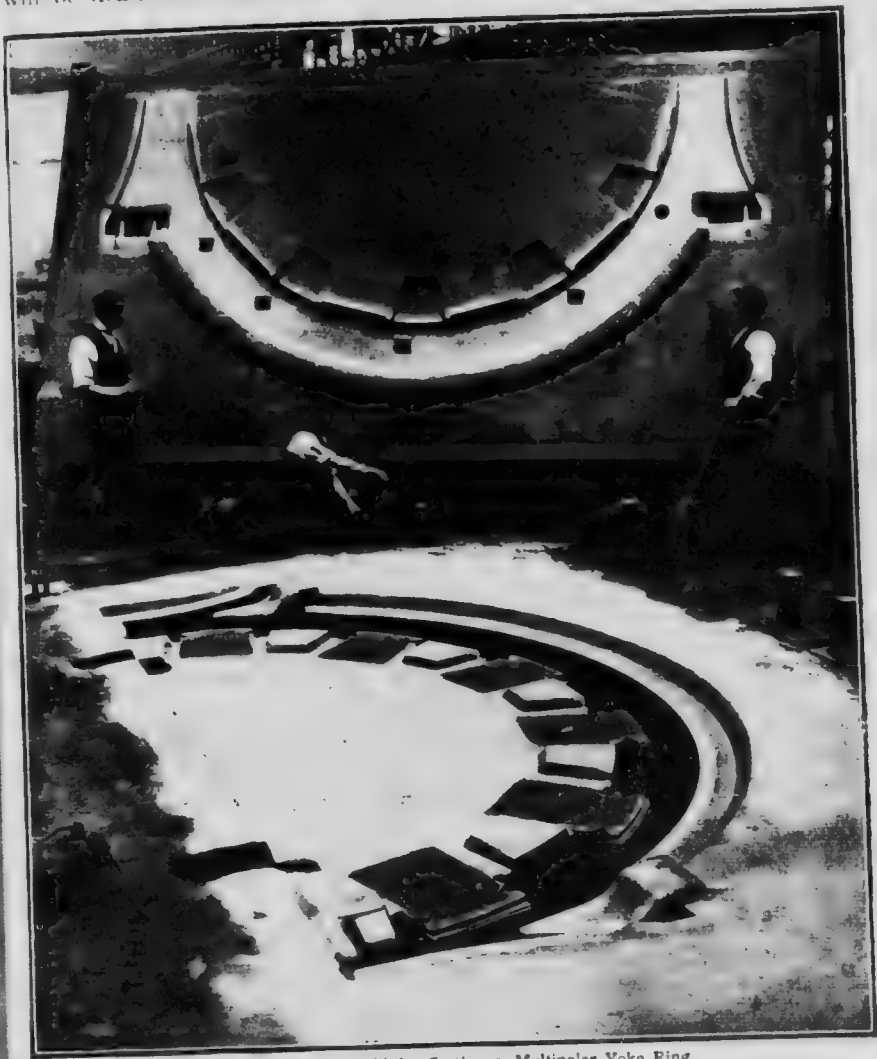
The Mould for Casting a Multipolar Yoke Ring.
